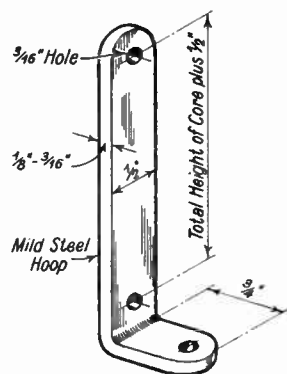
A.—SUITABLE DIMENSIONS FOR CONSTRUCTING CORE CLAMPS, FOUR OF WHICH WOULD BE REQUIRED FOR ONE TRANSFORMER.
